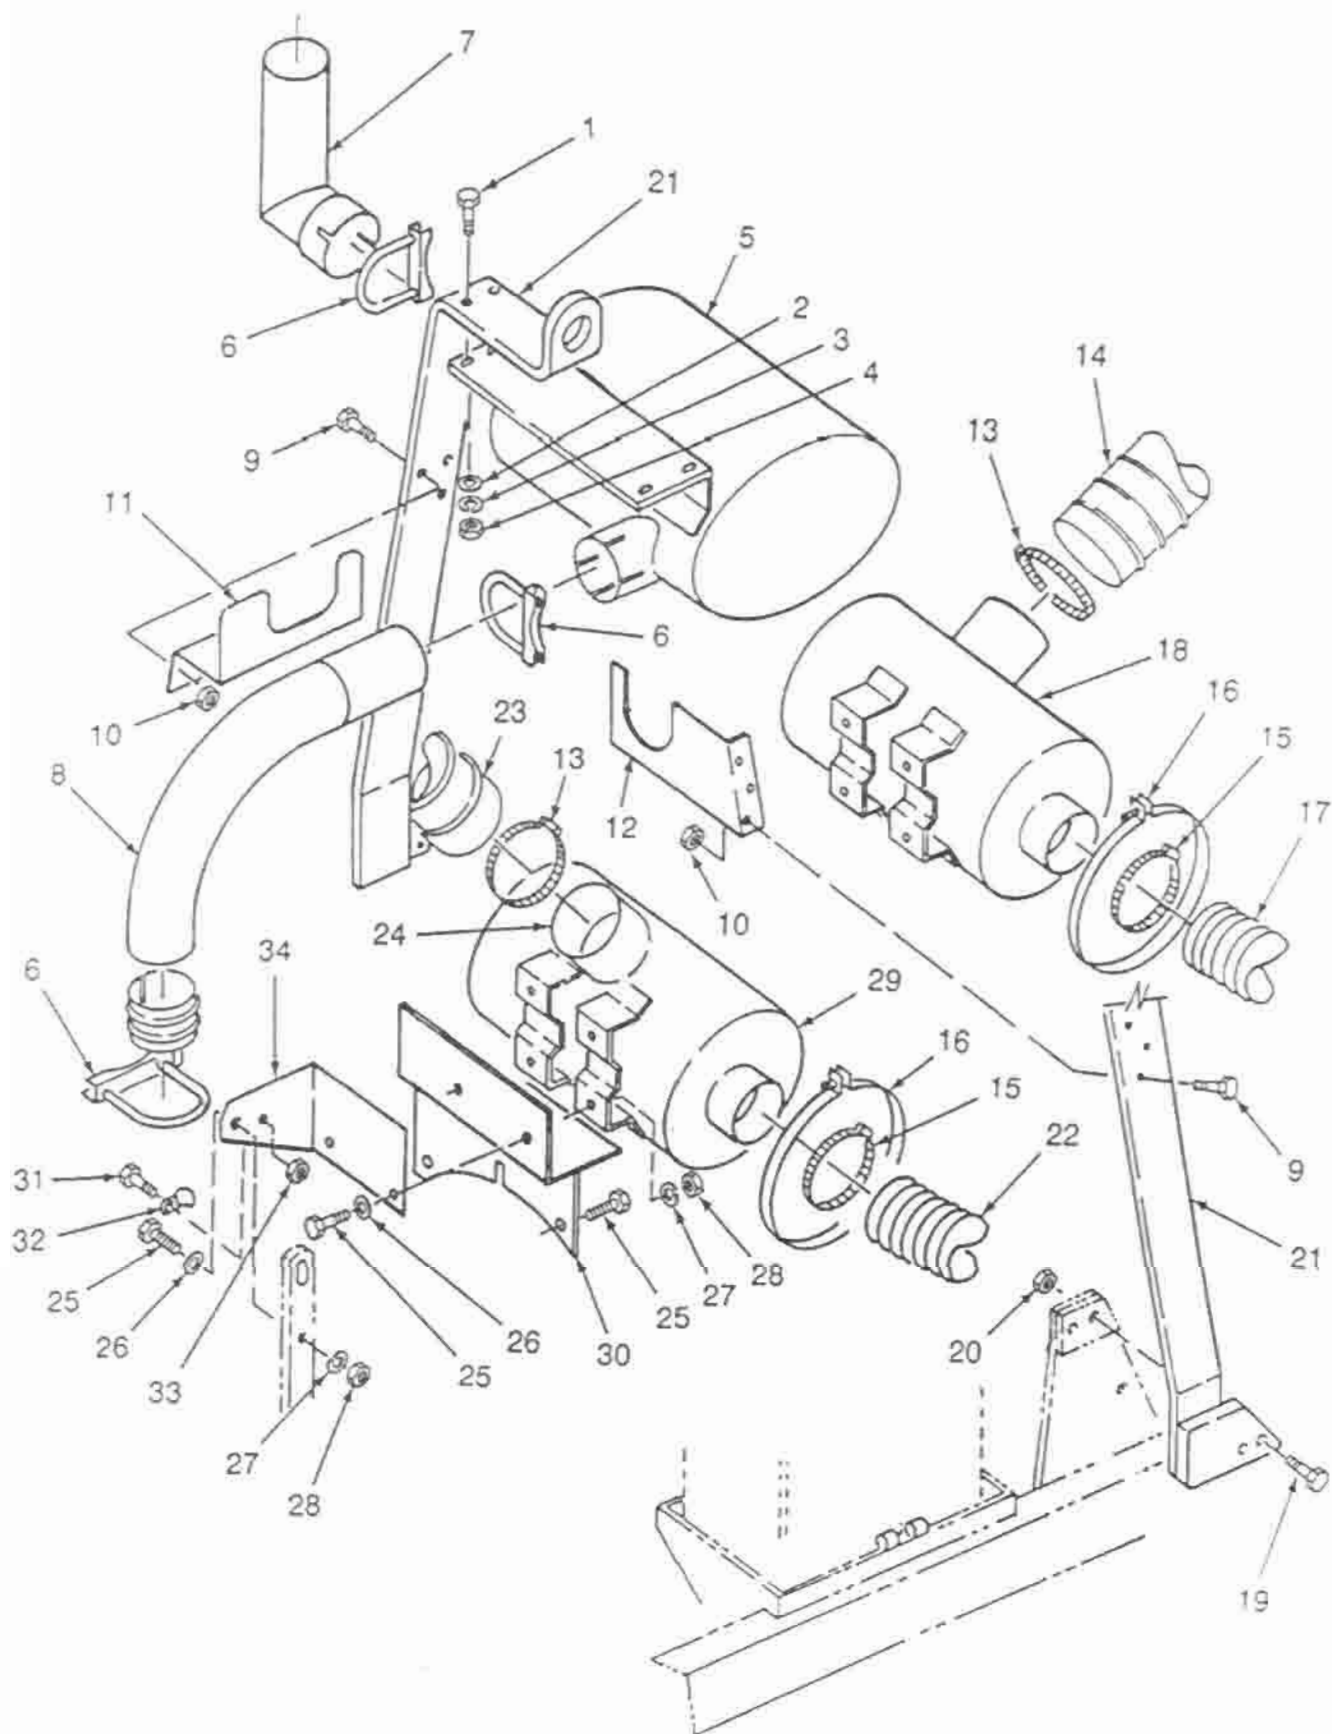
Exhaust Muffler And Air Cleaner Assembly
